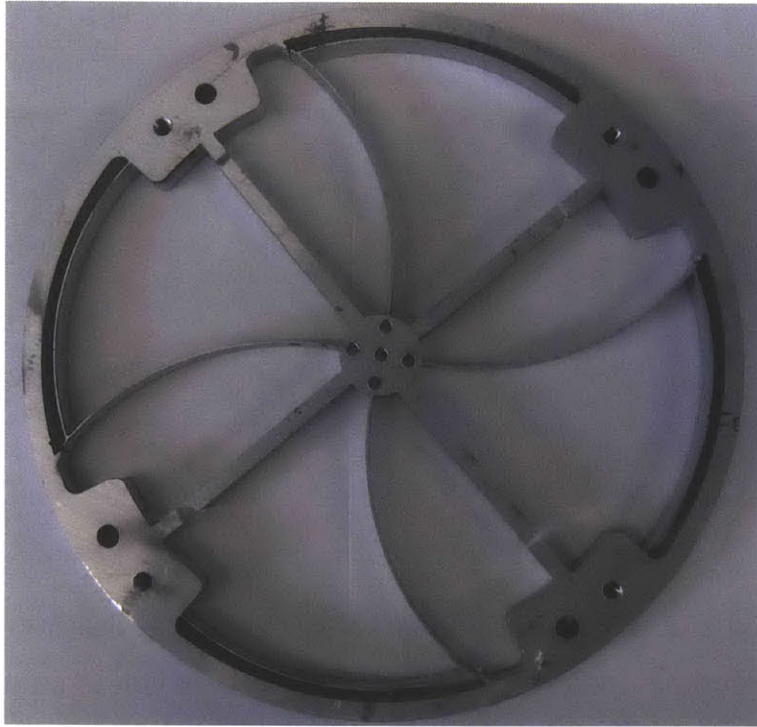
The final flexure design machined from 6061-T6 Aluminum
